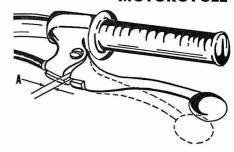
The clutch hand lever should have  $\frac{1}{16}$ -1/8-inch free play at (A).
